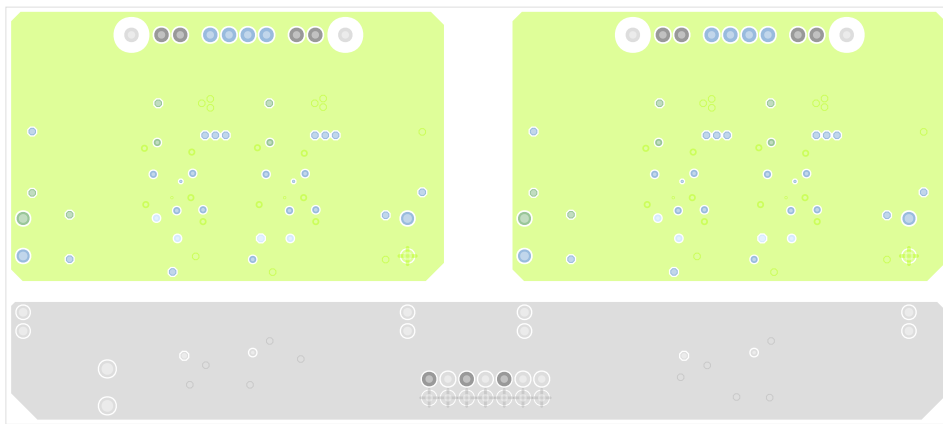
PCB design of the 48 VDC S4T bridge gate driver, showing the second copper layer (layer 2 of 4).
